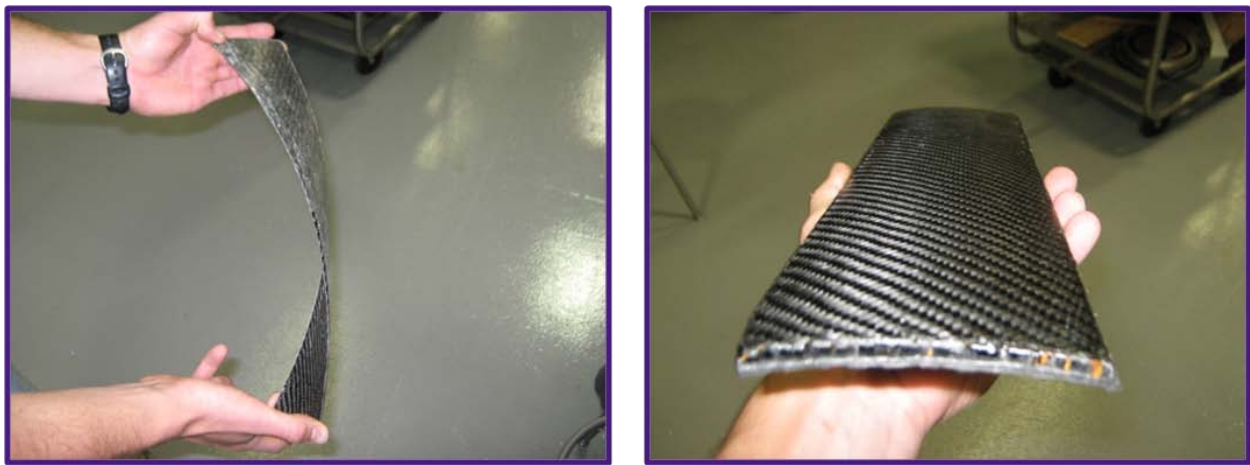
2-ply CFRC Blade made on Male Mold (Left); 2-ply CFRC Blade w/ Nomex® Honeycomb Core made on Female Mold (Right)
